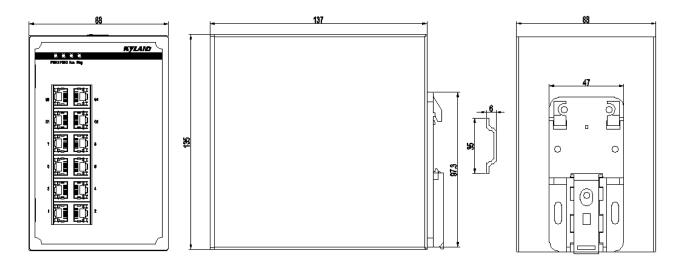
Dimensions for DIN-Rail Mounting (unit: mm)
